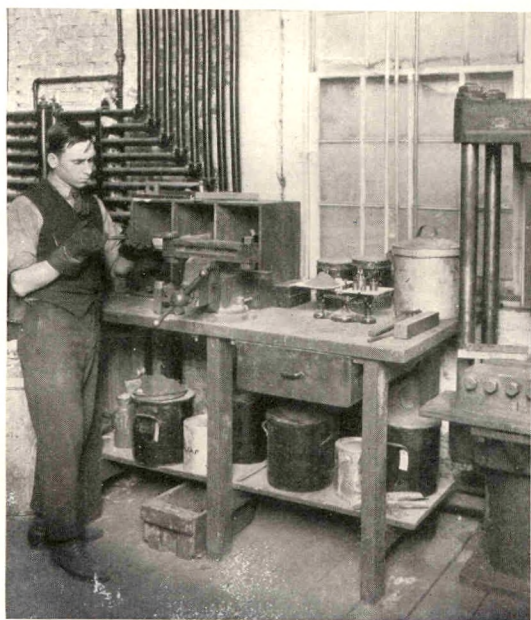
Compressing the metallic tungsten powder to rod form by means of hydraulic press and steel mold.
